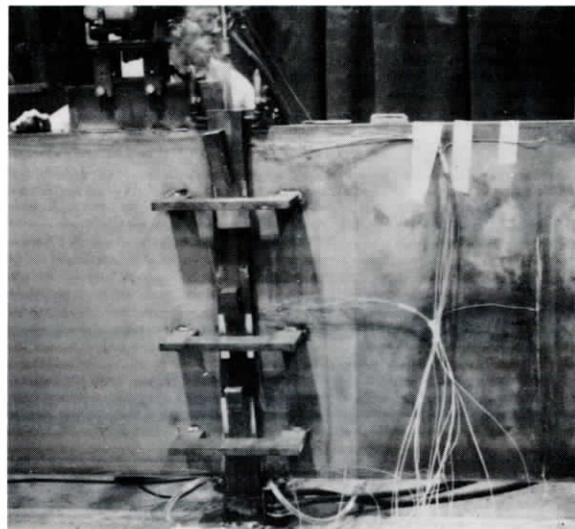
Photograph of electroslag welding experiment. The vertical channel will contain the weld area. Wire are to thermocouples.
